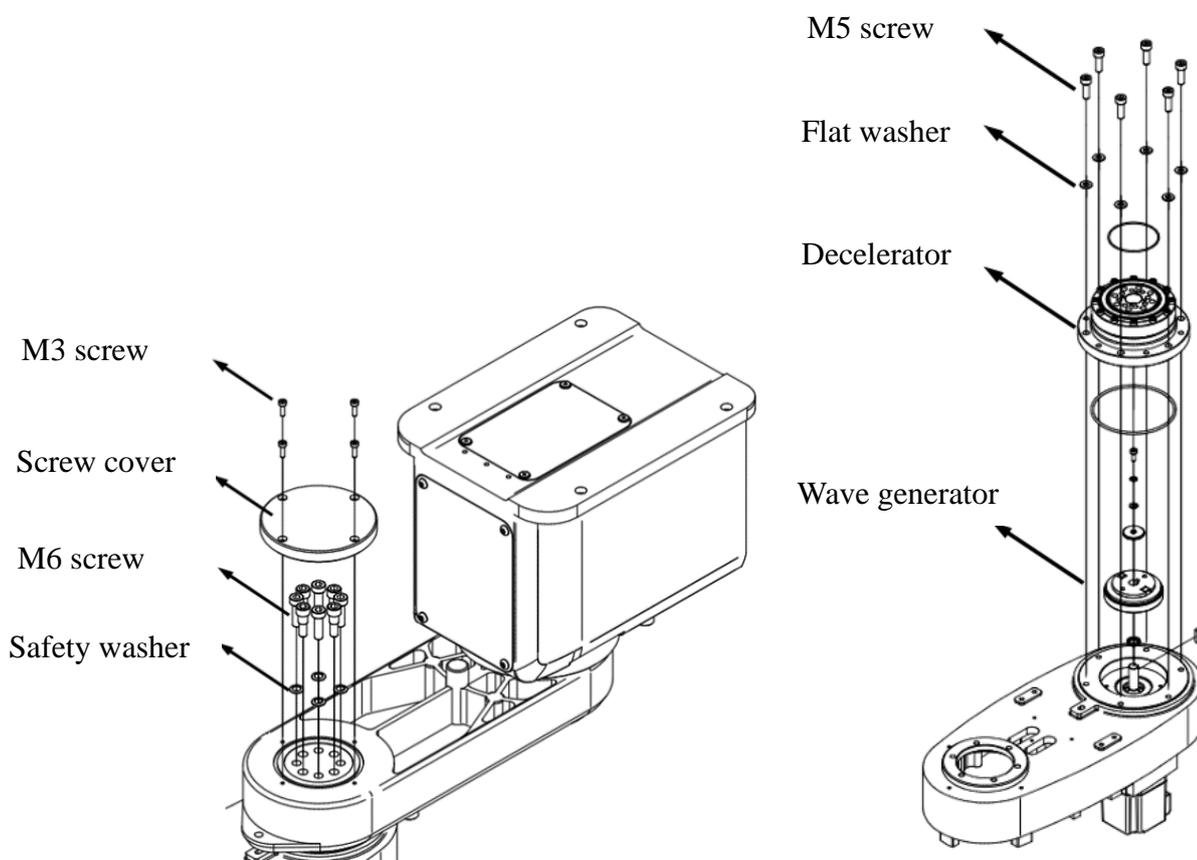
Illustrations of Dissembling Decelerator for Robot J2
